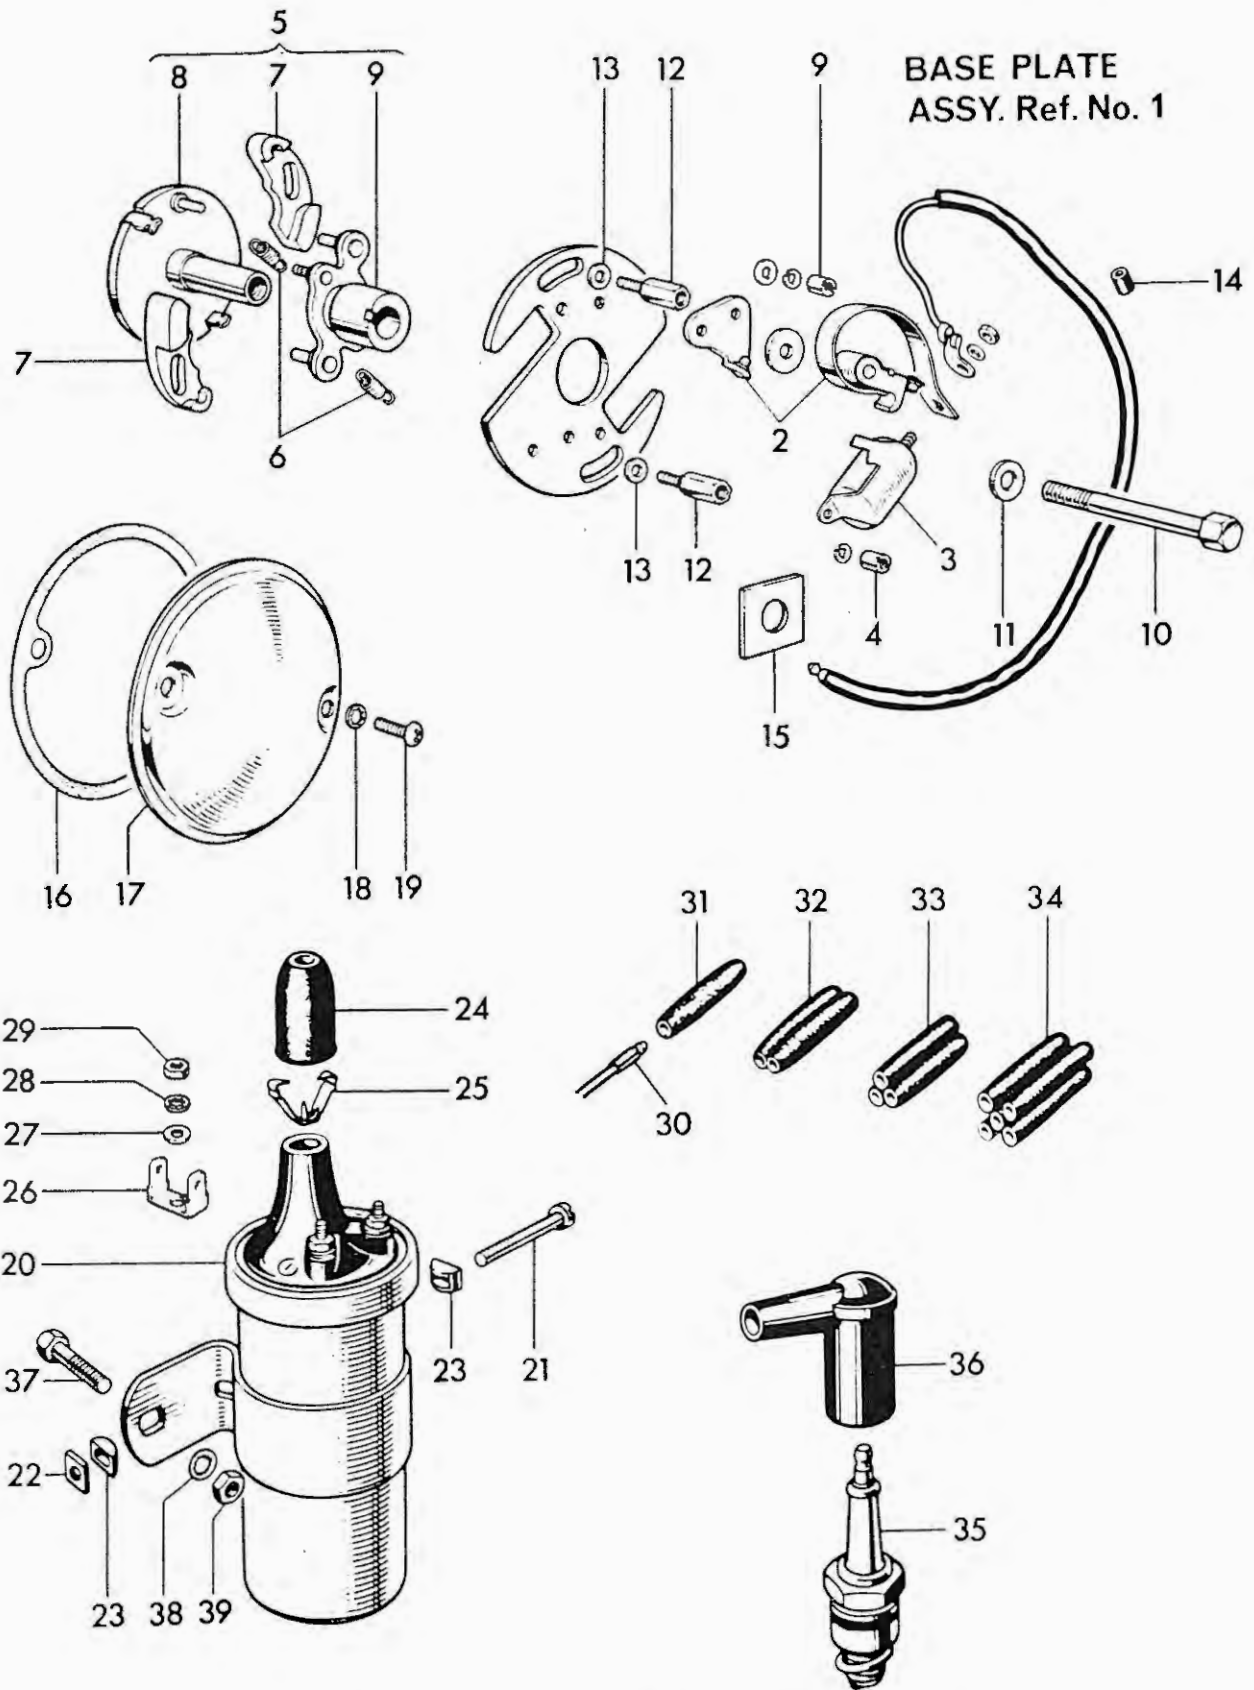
CONTACT BREAKER AND IGNITION COIL
